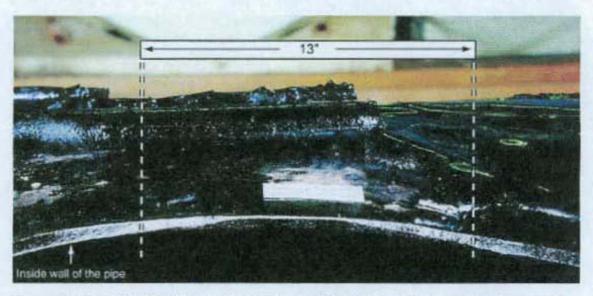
View of top fracture surface of 13-inch-long crack, showing penetration nearly through pipe wall in center.
